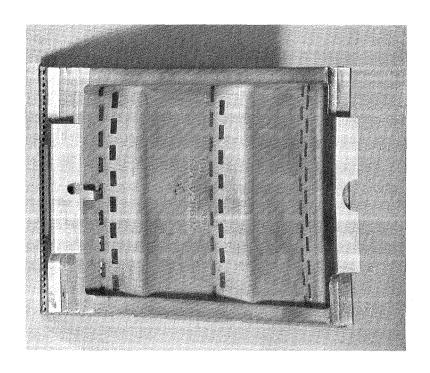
Completed Segment with Cold Side Feed Slots and Attachment Hooks Installed
